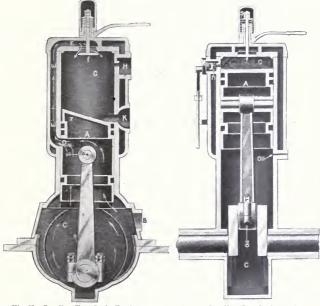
Smalley Two-Cycle Engine. Piston at bottom of stroke.
